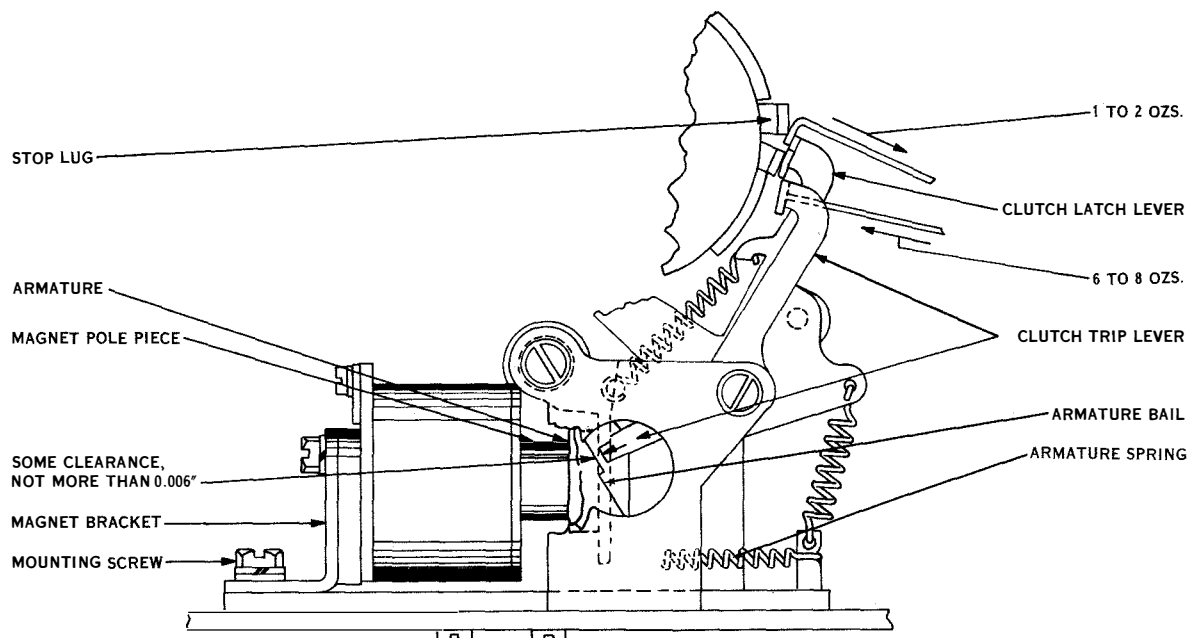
Clutch Magnet Bracket, and Trip and Latch Lever Spring Tensions
